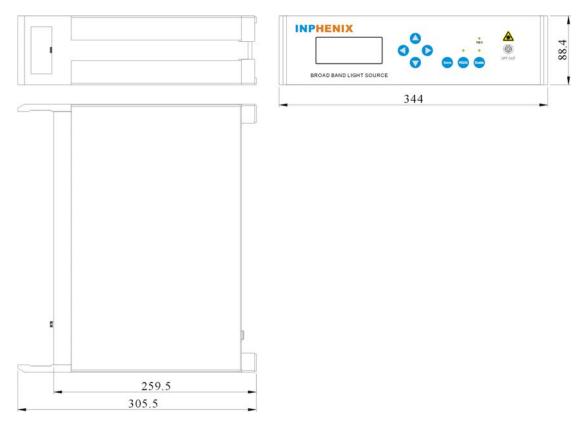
Mechanical drawing of IPSDM0835-0318 SLD light source desktop
